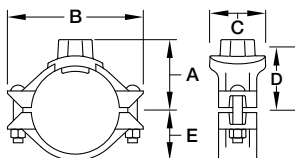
MECHANICAL TEE THREADED OUTLET
